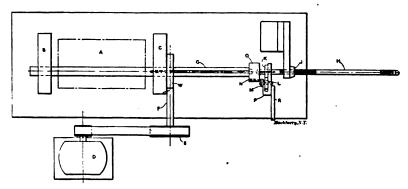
Outline of Arrangement of the Drive and Feed of the Boring Bar of the Jig in Fig. 131
